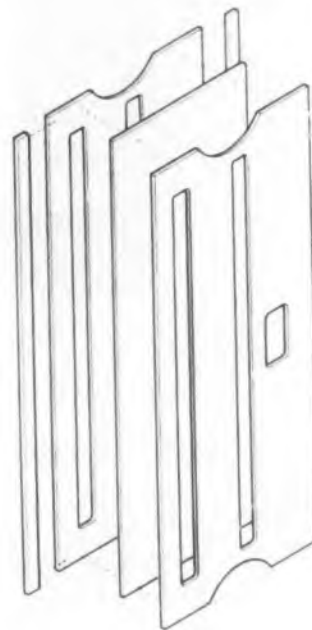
Exploded view of slide rule. Align arrow markers on both scales; staple along edge through spacers.
